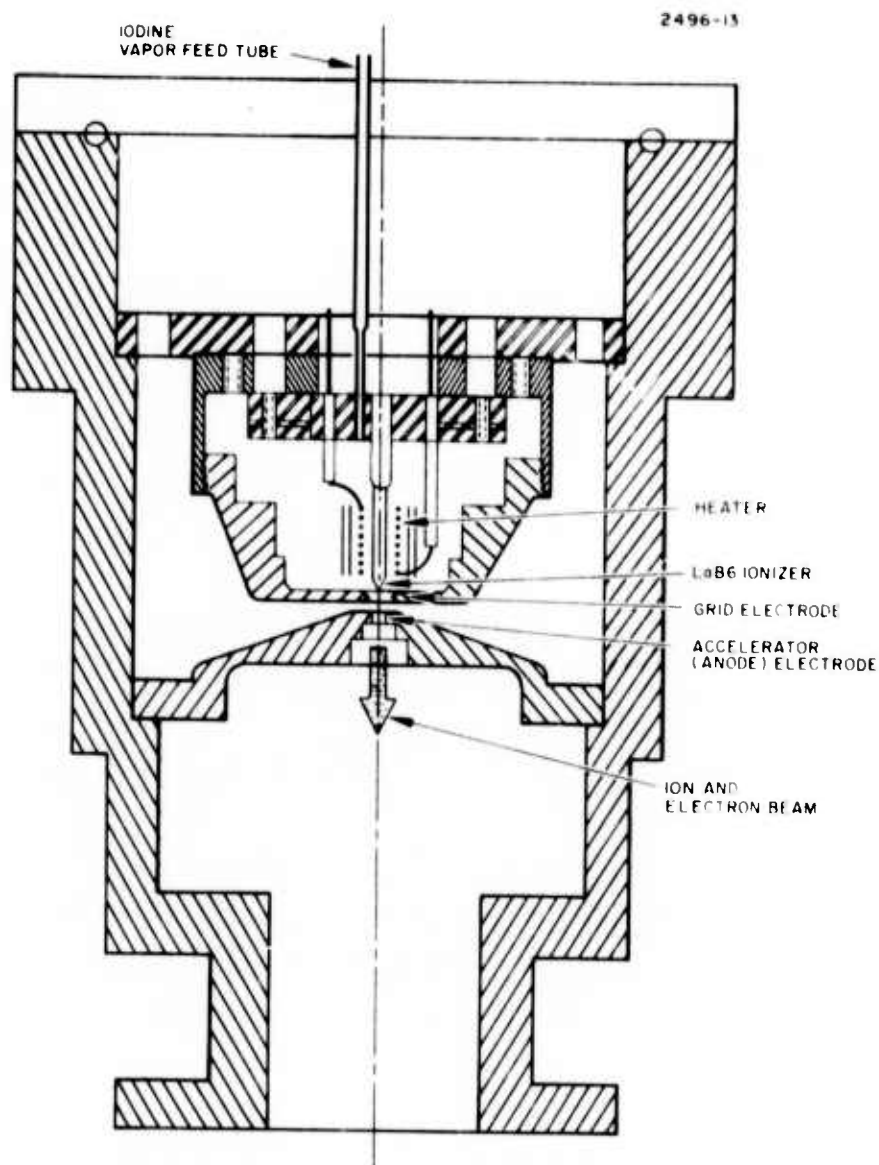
Cutaway view of the high field-point geometry ion/electron source. The LaB_6 rod cathode, the spiral tungsten wire heater and the heat shields are mounted on an Al_2O_3 plate. This unit is contained inside the grid assembly which is mounted on an Al_2O_3 plate that locates this unit with respect to the grounded anode. The iodine vapor feed tube delivers the iodine with the chamber formed by the grid assembly.
